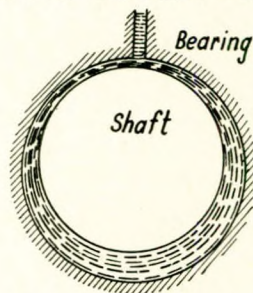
Large bearing clearances are necessary with the lubricator shown in Fig. 5.
